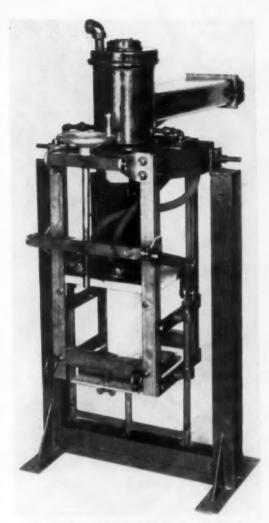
(left) Modified Reeve Furnace With Metal Casing. Mold is in arm extending to rear. Metal is poured by tilting assembly 90°
